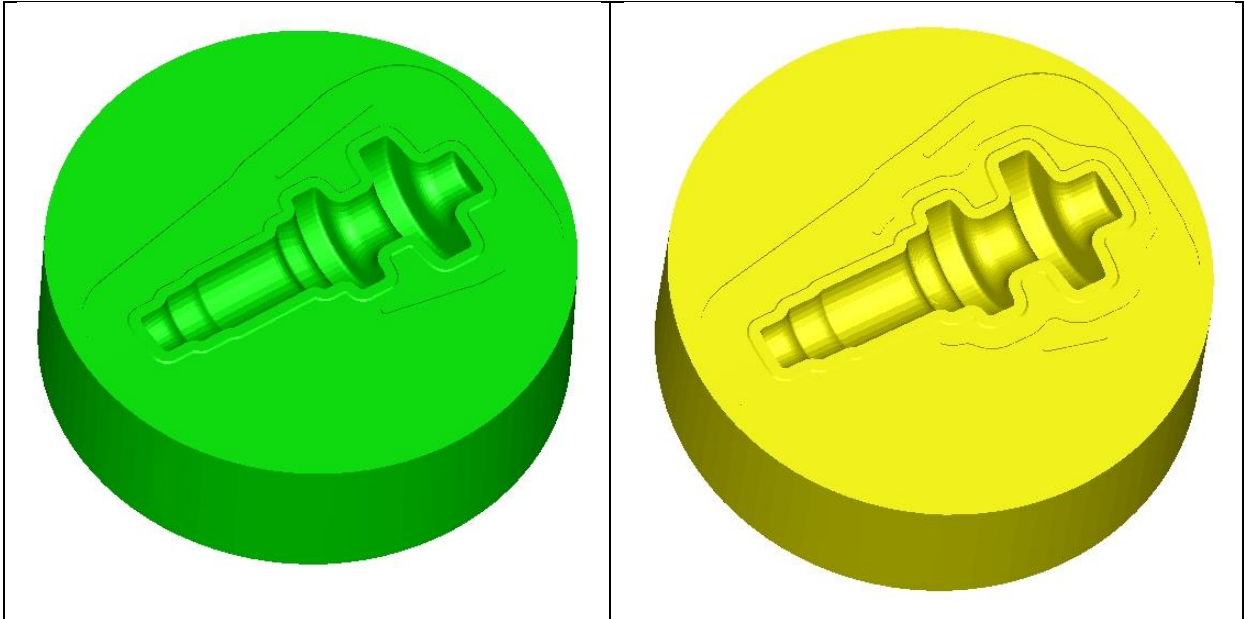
Final forging stage dies; lower die (left)- upper die (right)
